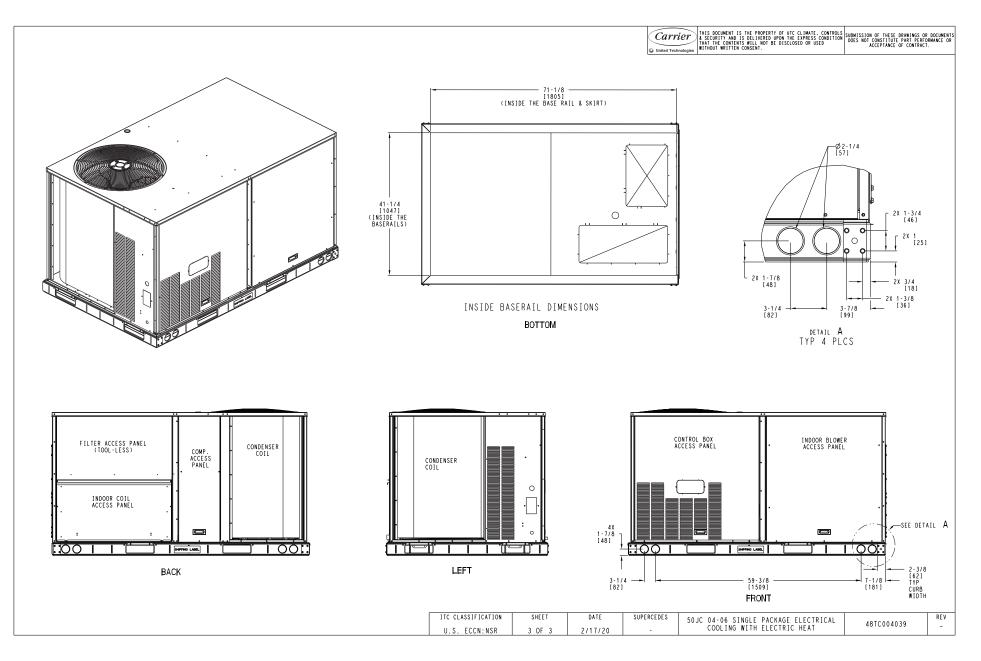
50JC 04-06 Unit Dimensional Drawing (cont)
